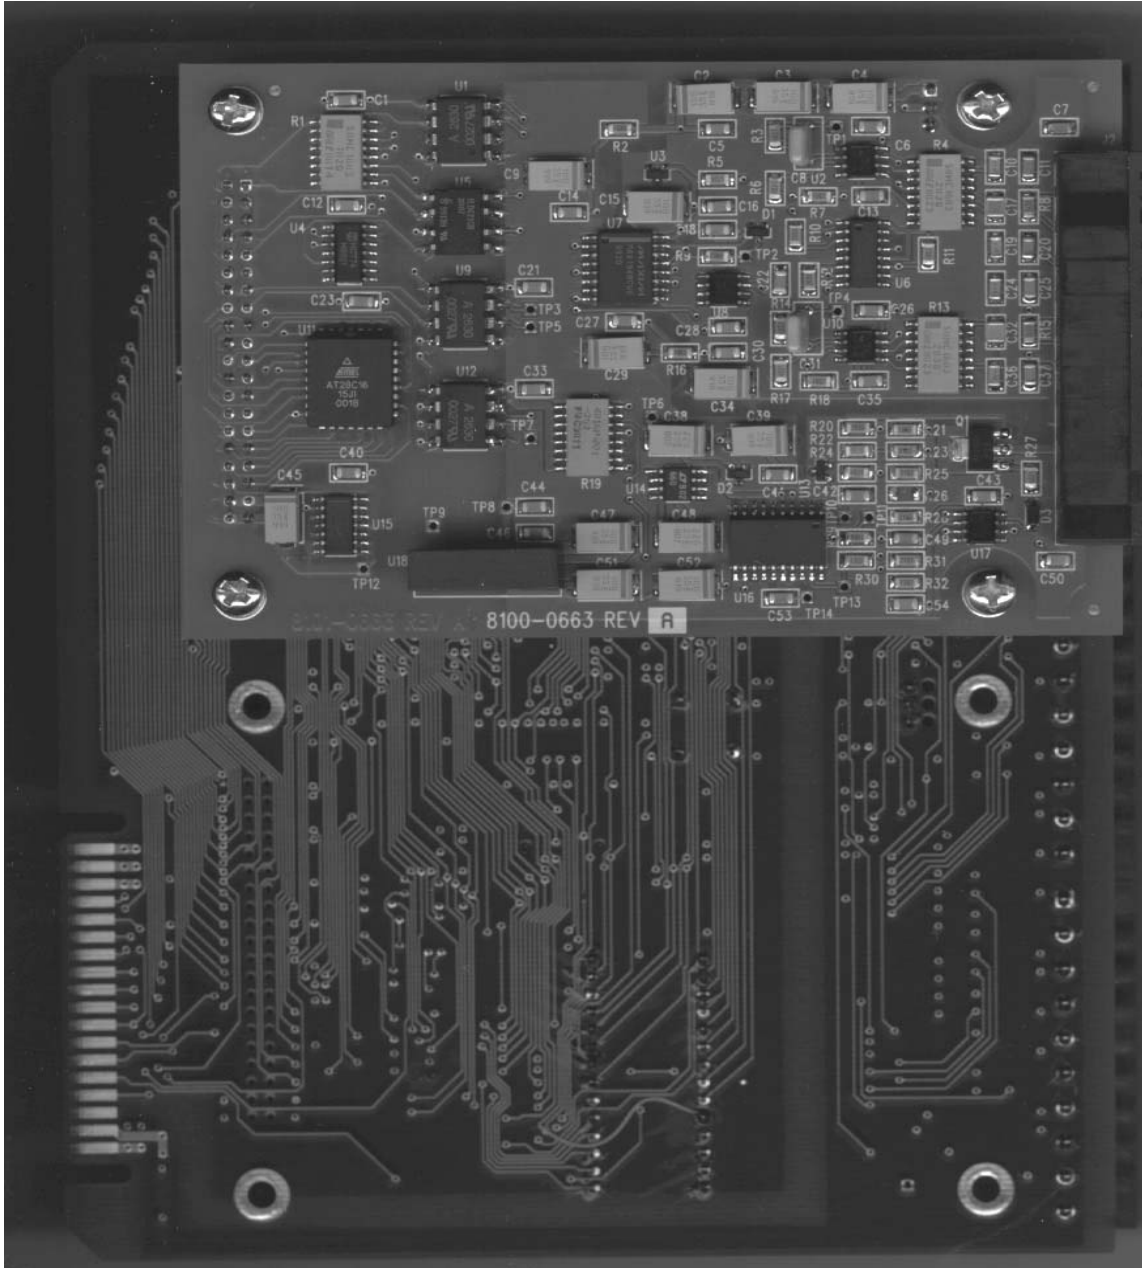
Mounting the Analog I/O Card on the CPU Board
